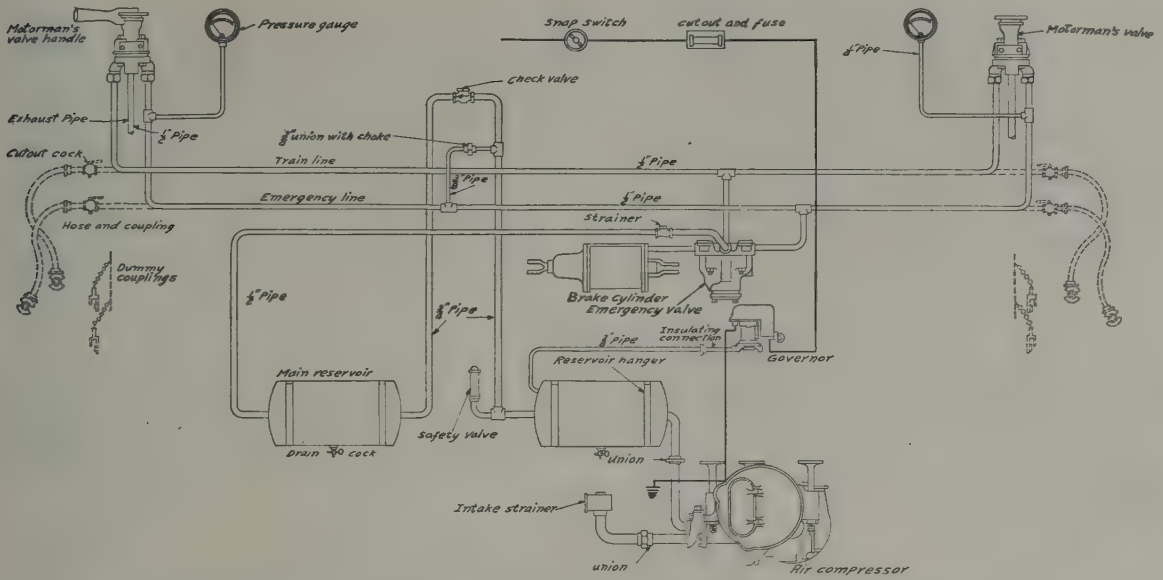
Straight Air Brake Equipment with Emergency Feature for Motor Car.
